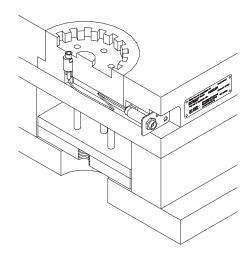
Sensor, cable, mounting plate (Art. No. 3.520.328) and identification label (Art. No. 3.520.842)
